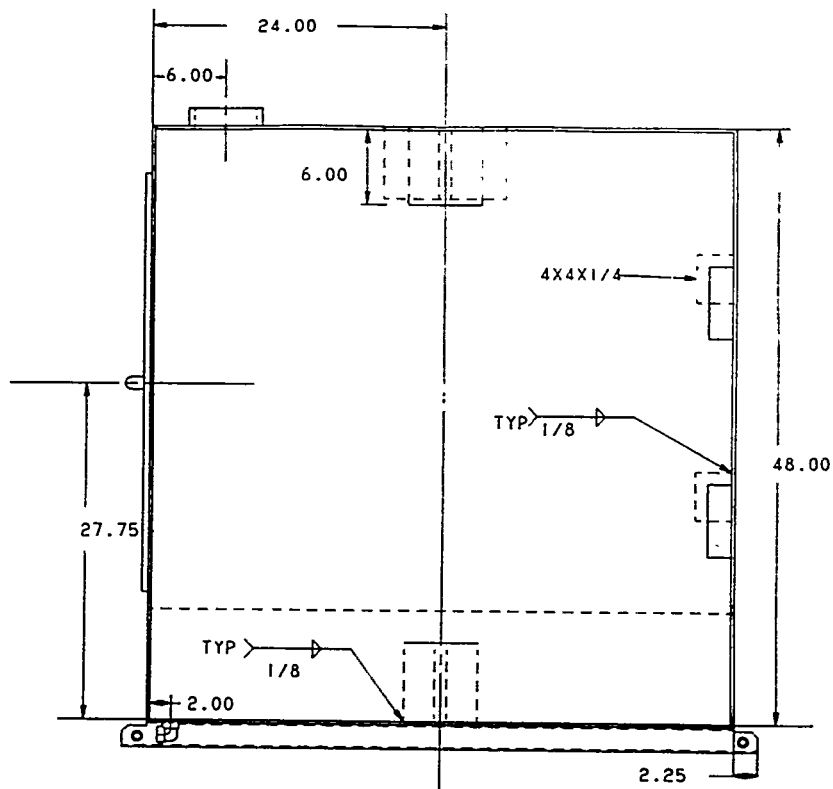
Drawing Showing Details of Test Tank Assembly
